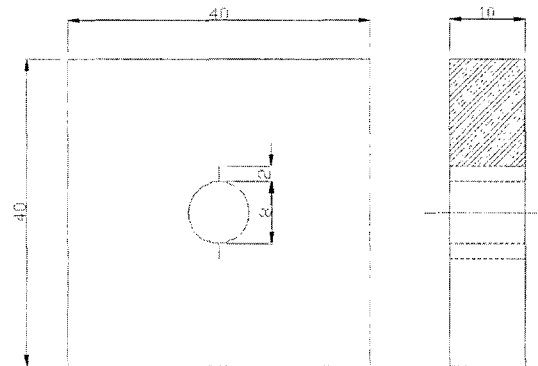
The dimensions of the DCDC specimen. The DCD specimen was a 40 × 40 × 10 mm³ plate which has a hole of 8 mm diameter and two full-thickness groove of 2 mm length
